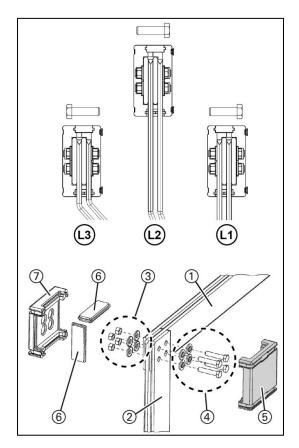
Busbar 2500 A, feeder 2500 A, Ur = 24 kV, end panel with insulating shells
